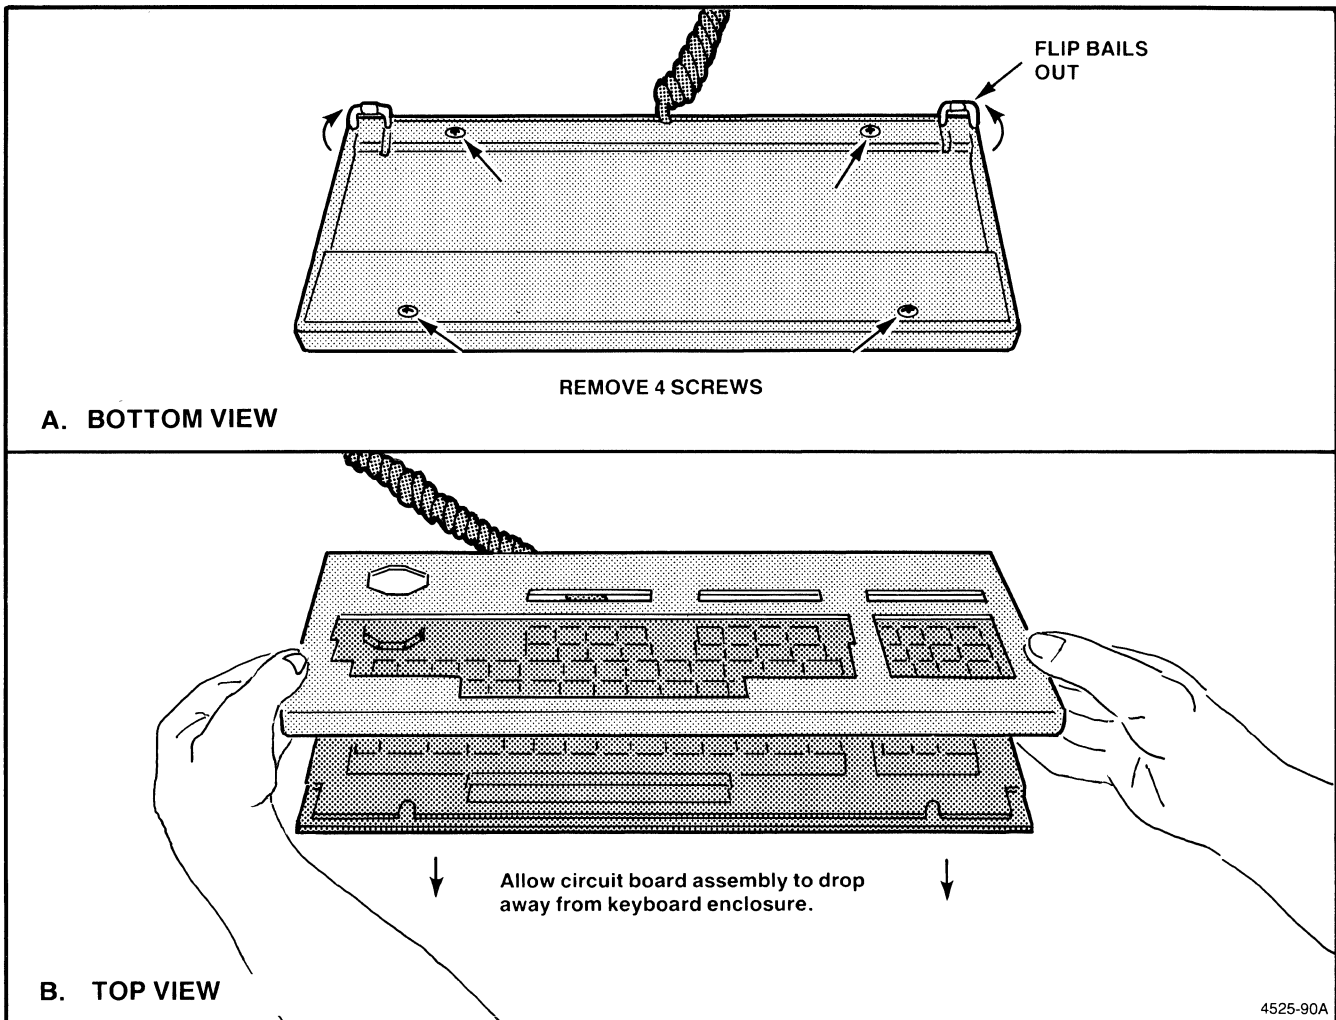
Separating the Keyboard Enclosure From the Keyboard and Bottom Panel.
